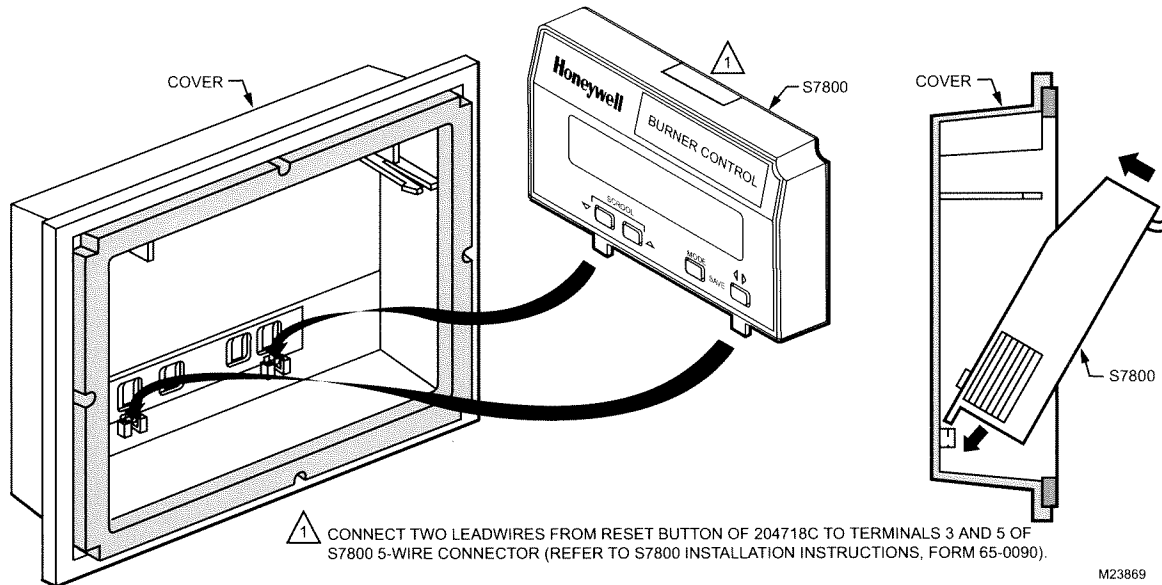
Installing S7800 Keyboard Display Module in 204718 Cover Assembly.
